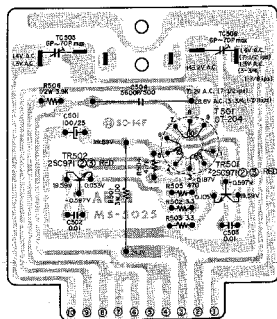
OSC. P.C. BOARD MS-5025 (Reverse Side)
